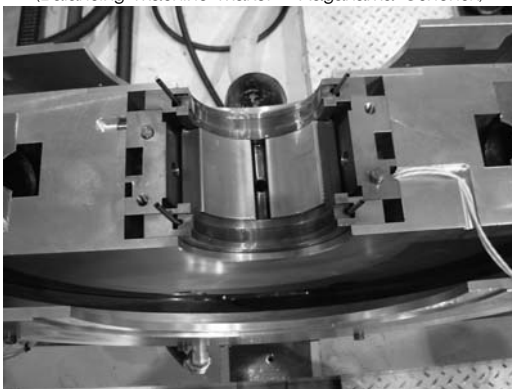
Bearing bottom half mounted on the pedestal bearing casing through the bearing adaptor-ring
